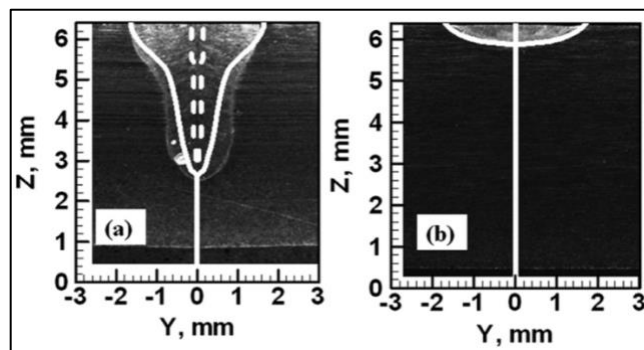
Cross section of melt pool. Left: Laser keyhole melt pool penetration. Right: Arch welding melt pool penetration [48].
